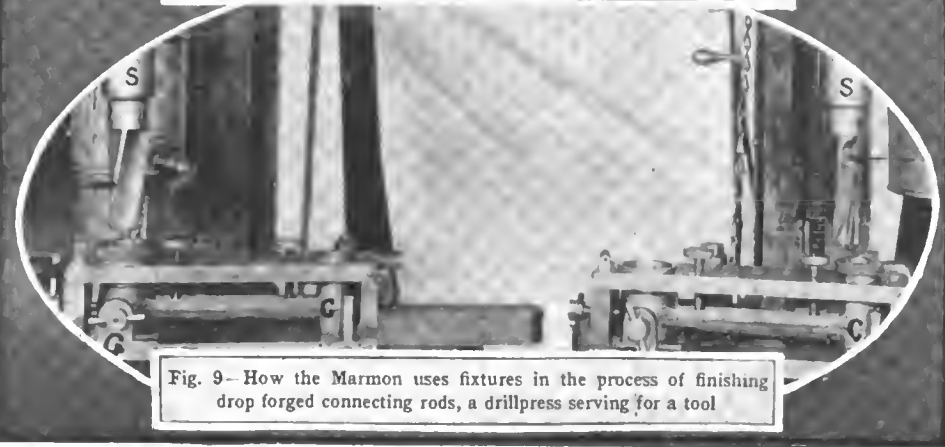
How the Marmon uses fixtures in the process of finishing drop forged connecting rods, a drillpress serving for a tool
